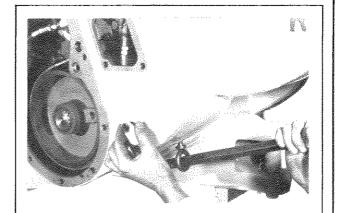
INSTALLATION OF HYDRAULIC BRAKE ASSEMBLY, POWER CONTROLLED WINCH (Sheet 1 of 2)
